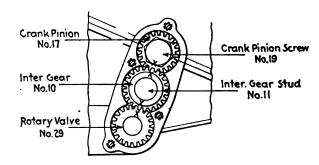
How the gears are lined up on a lever-driven close-quarter drill
